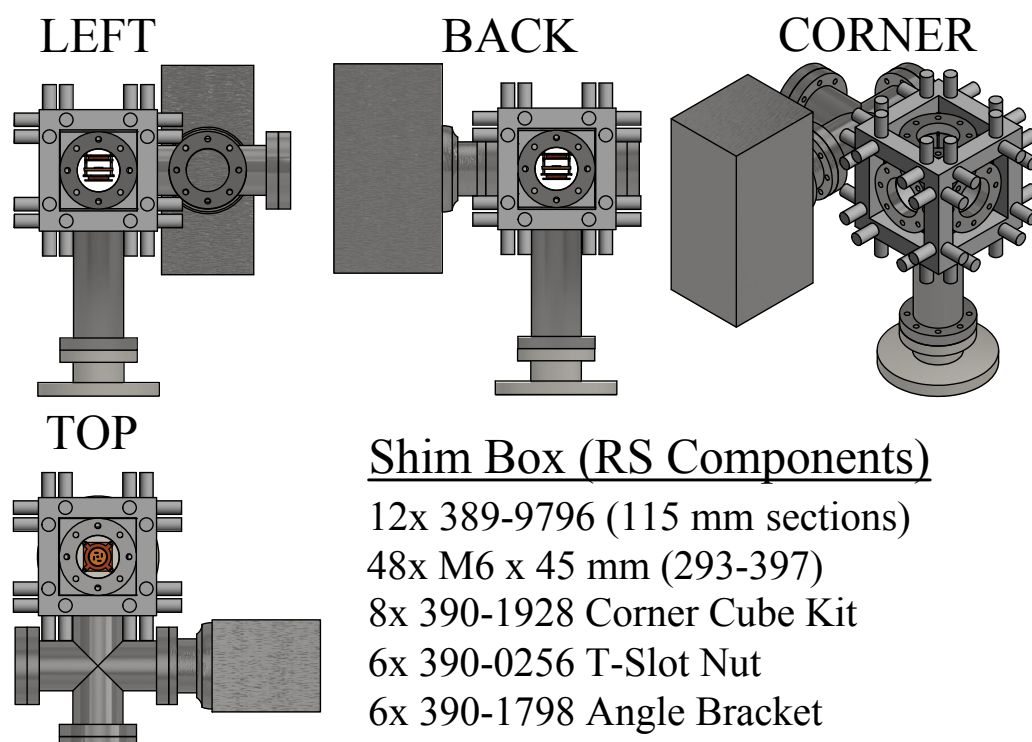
Angled CAD drawings of the assembled vacuum chamber.
